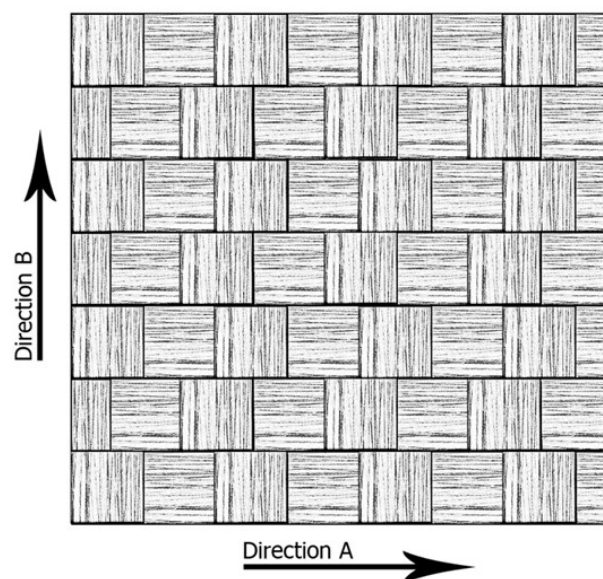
General view of the furniture board sample №2 with perpendicular scheme of structural elements placement
